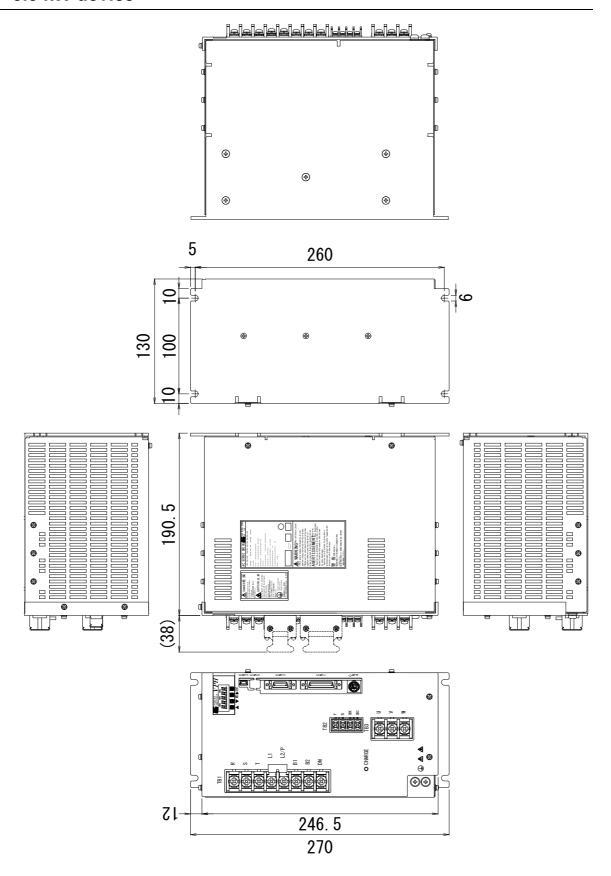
Outline drawing of the main unit of the device with 3.3 kW (Type 4)
